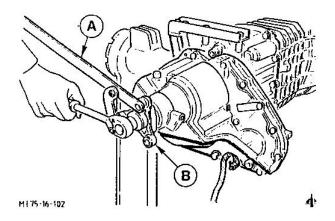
Remove output flange nut. A - Special Tool 15-030 B - Output flange
